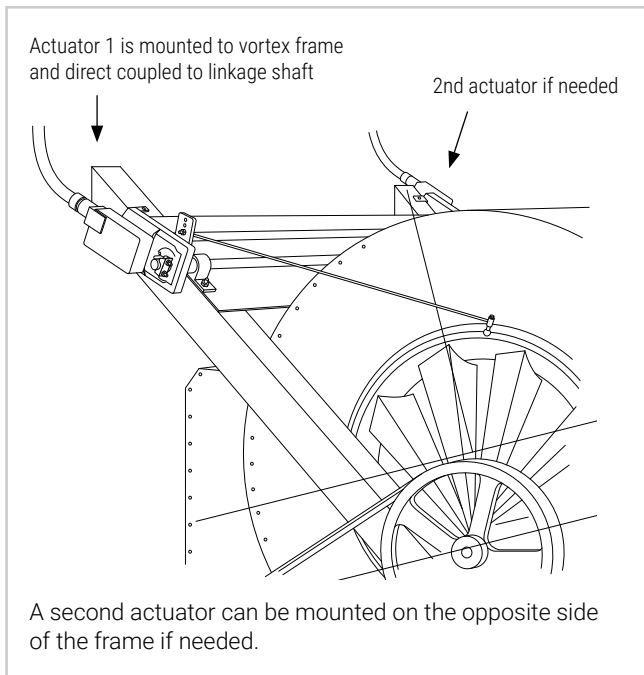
Actuator is mounted to the framework and connected to the inlet vanes with crank arm kit
